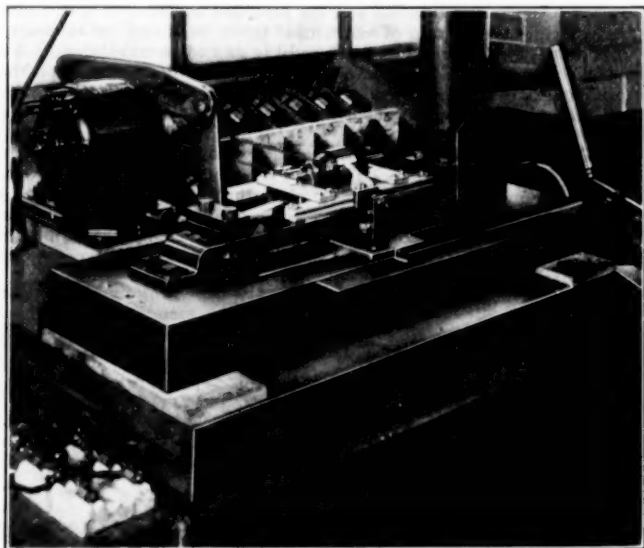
BALANCING MACHINE, SLIGHTLY MODIFIED
